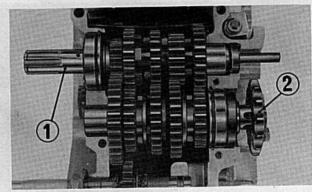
(1) Mainshaft assembly (2) Countershaft assembly
